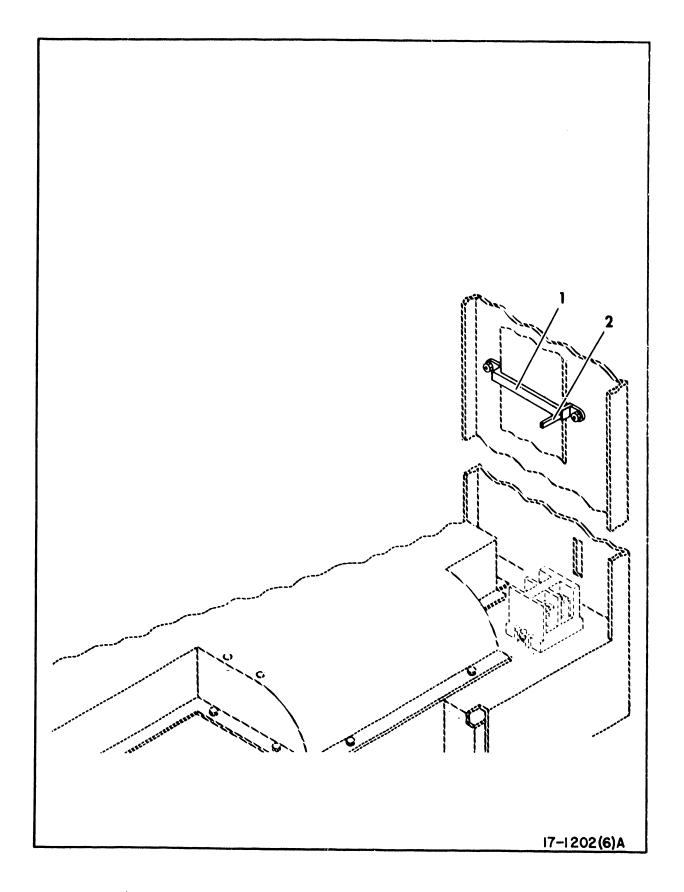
Frame & Air Assembly (Sheet 7.1)
